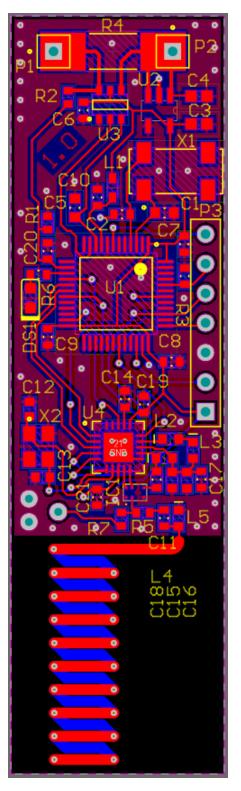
PCB layout for manufacturing, red represents copper on top layer while blue is copper on bottom layer
